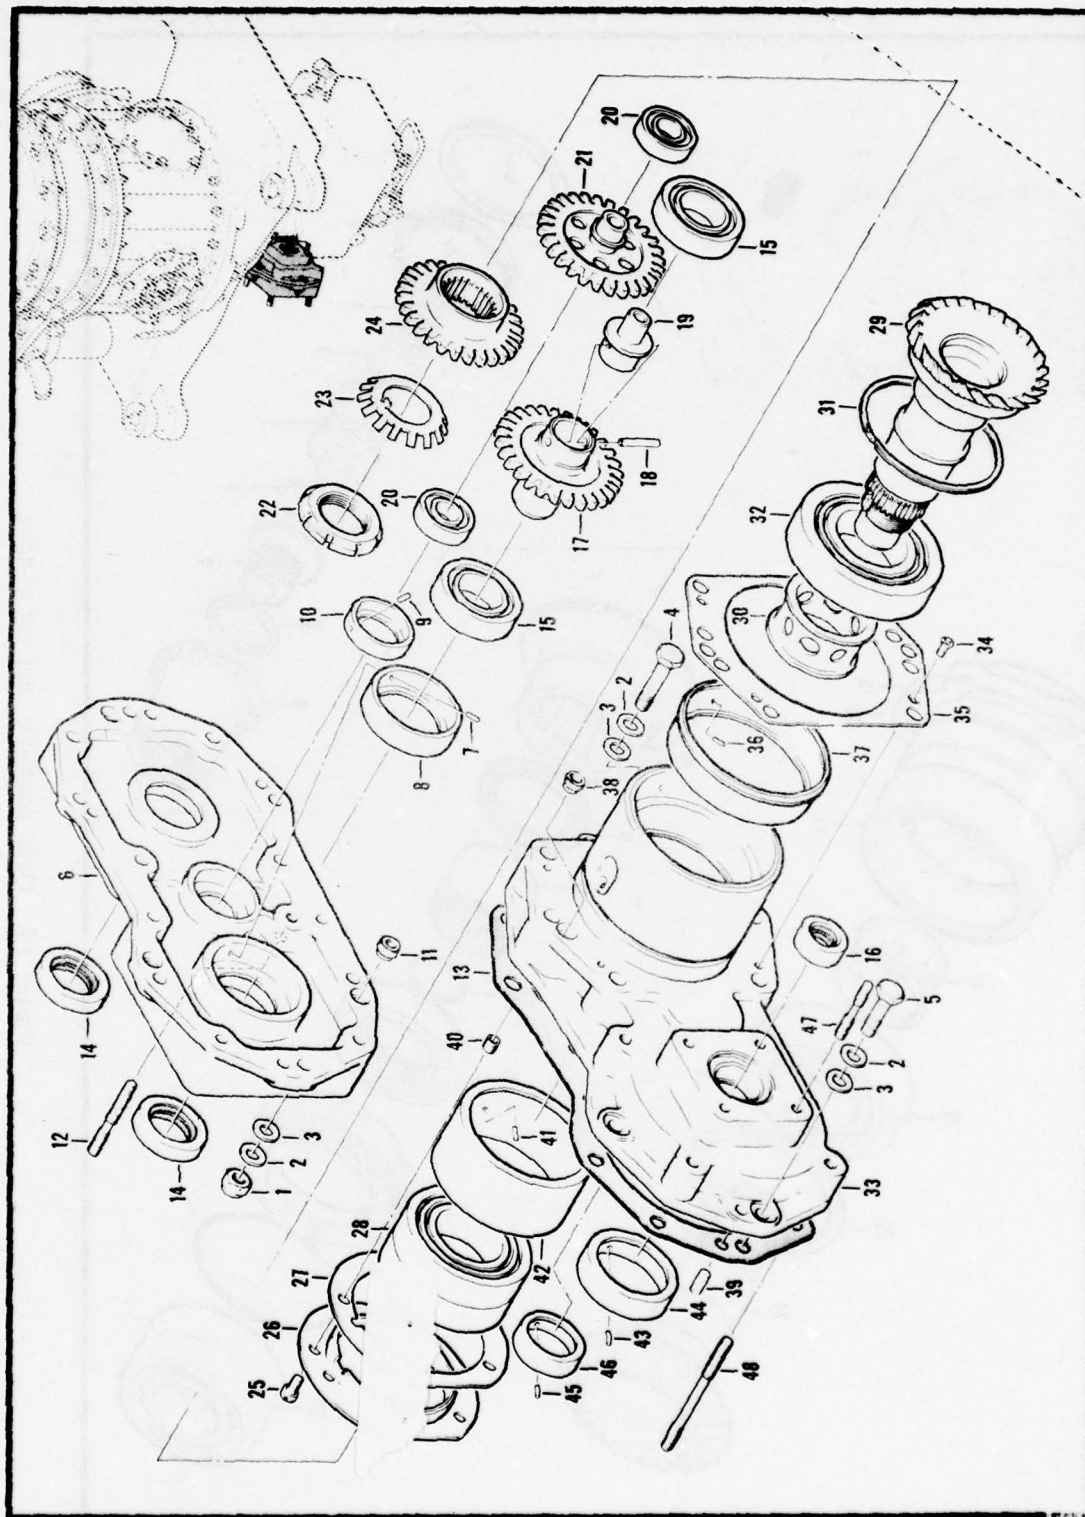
Quill assembly, dual hydraulic pump and tachometer drive.
